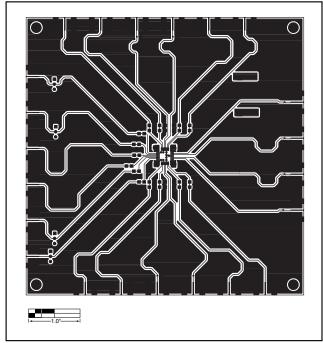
MAX9400 EV Kit PC Board Layout—Component Side
